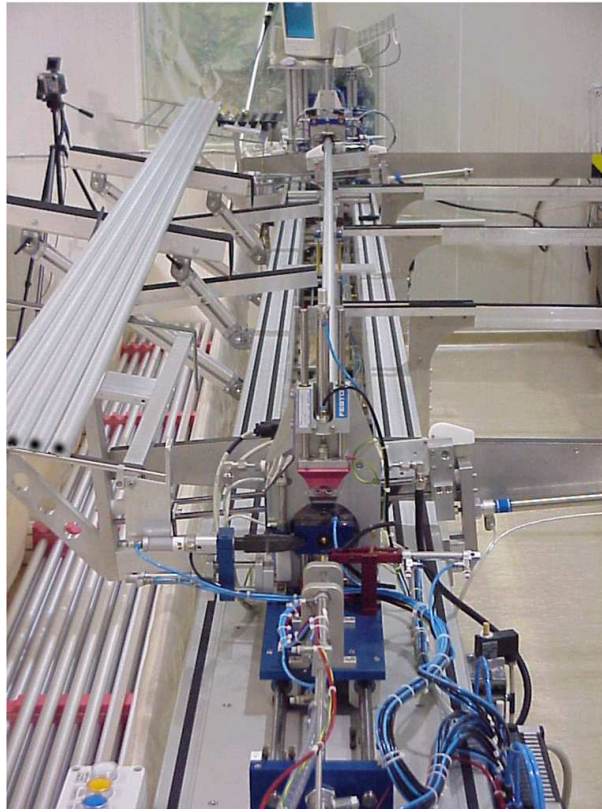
Picture of the wire machine taken at the south side. On the left the empty tubes come in. The tube in the center is being wired and will roll off at the right, where further quality checks are performed.
